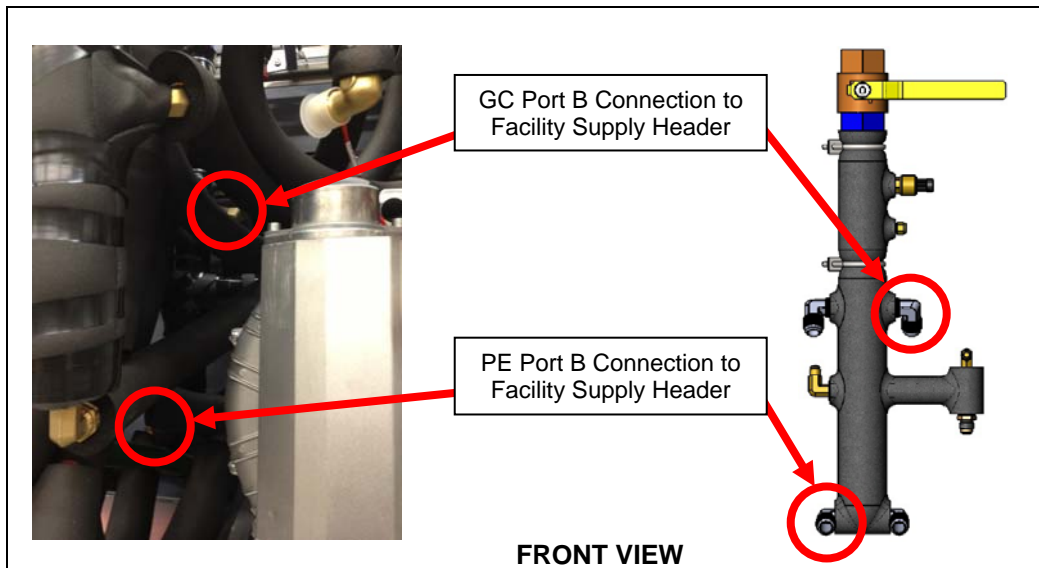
Front View Location of Port B Connections to Facility Supply Header for GC and PE Valves
